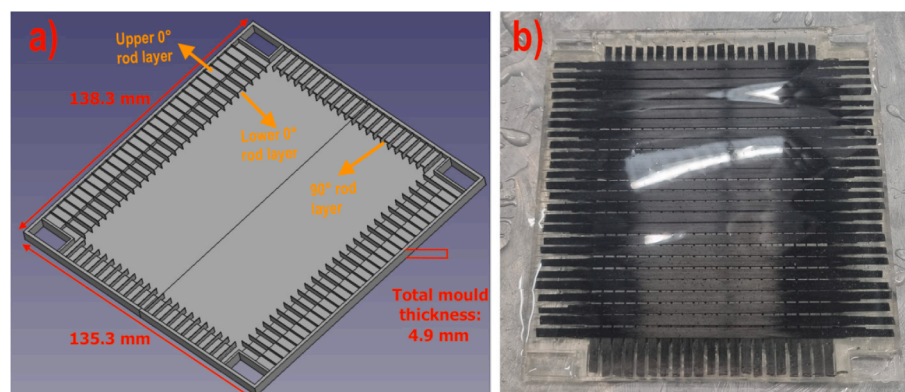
a) Computer assisted drawing of mould designed for TMC study, b) digital image of TMC prepared using the mould.
